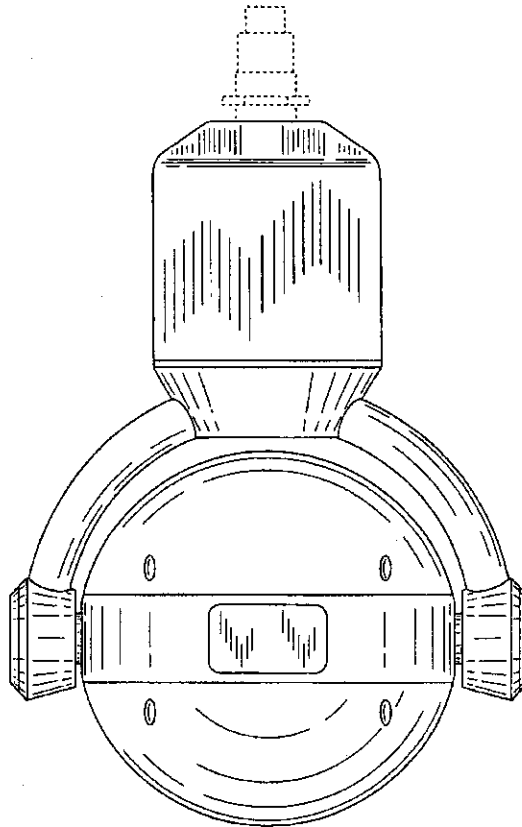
is a front elevational view of a camera mounting showing my new design;
